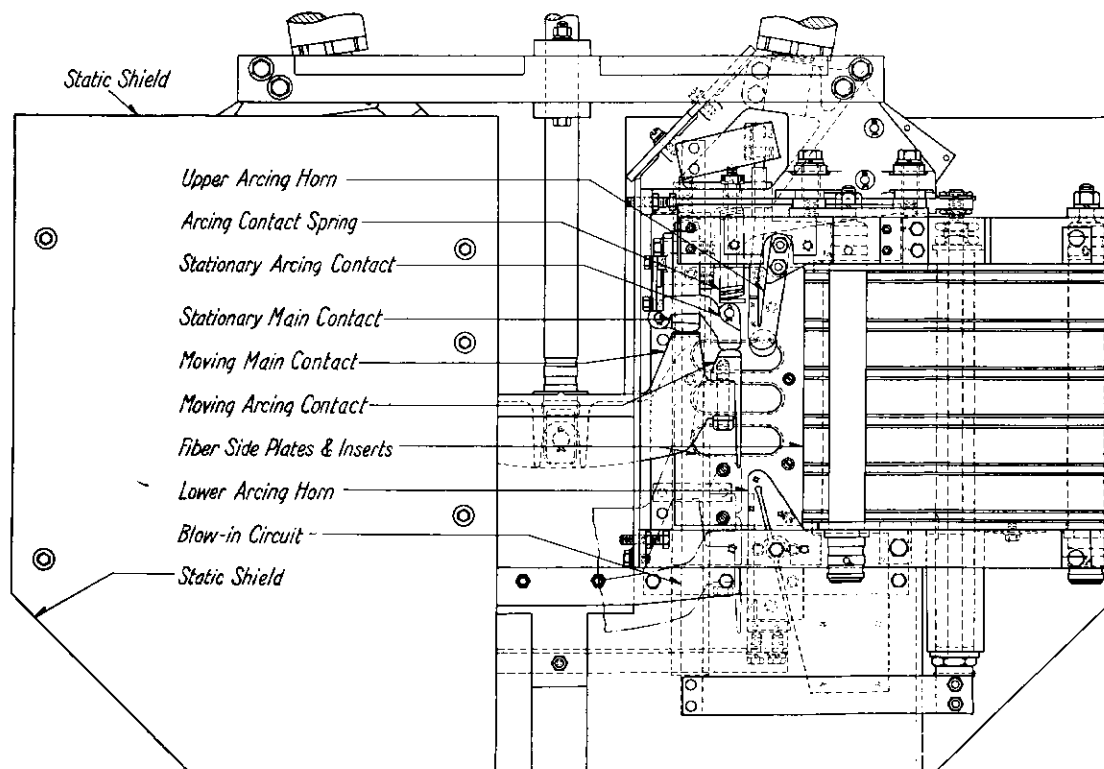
OUTLINE, ARRANGEMENTS OF THE DEIONIZING CHAMBERS AND CONTACTS
